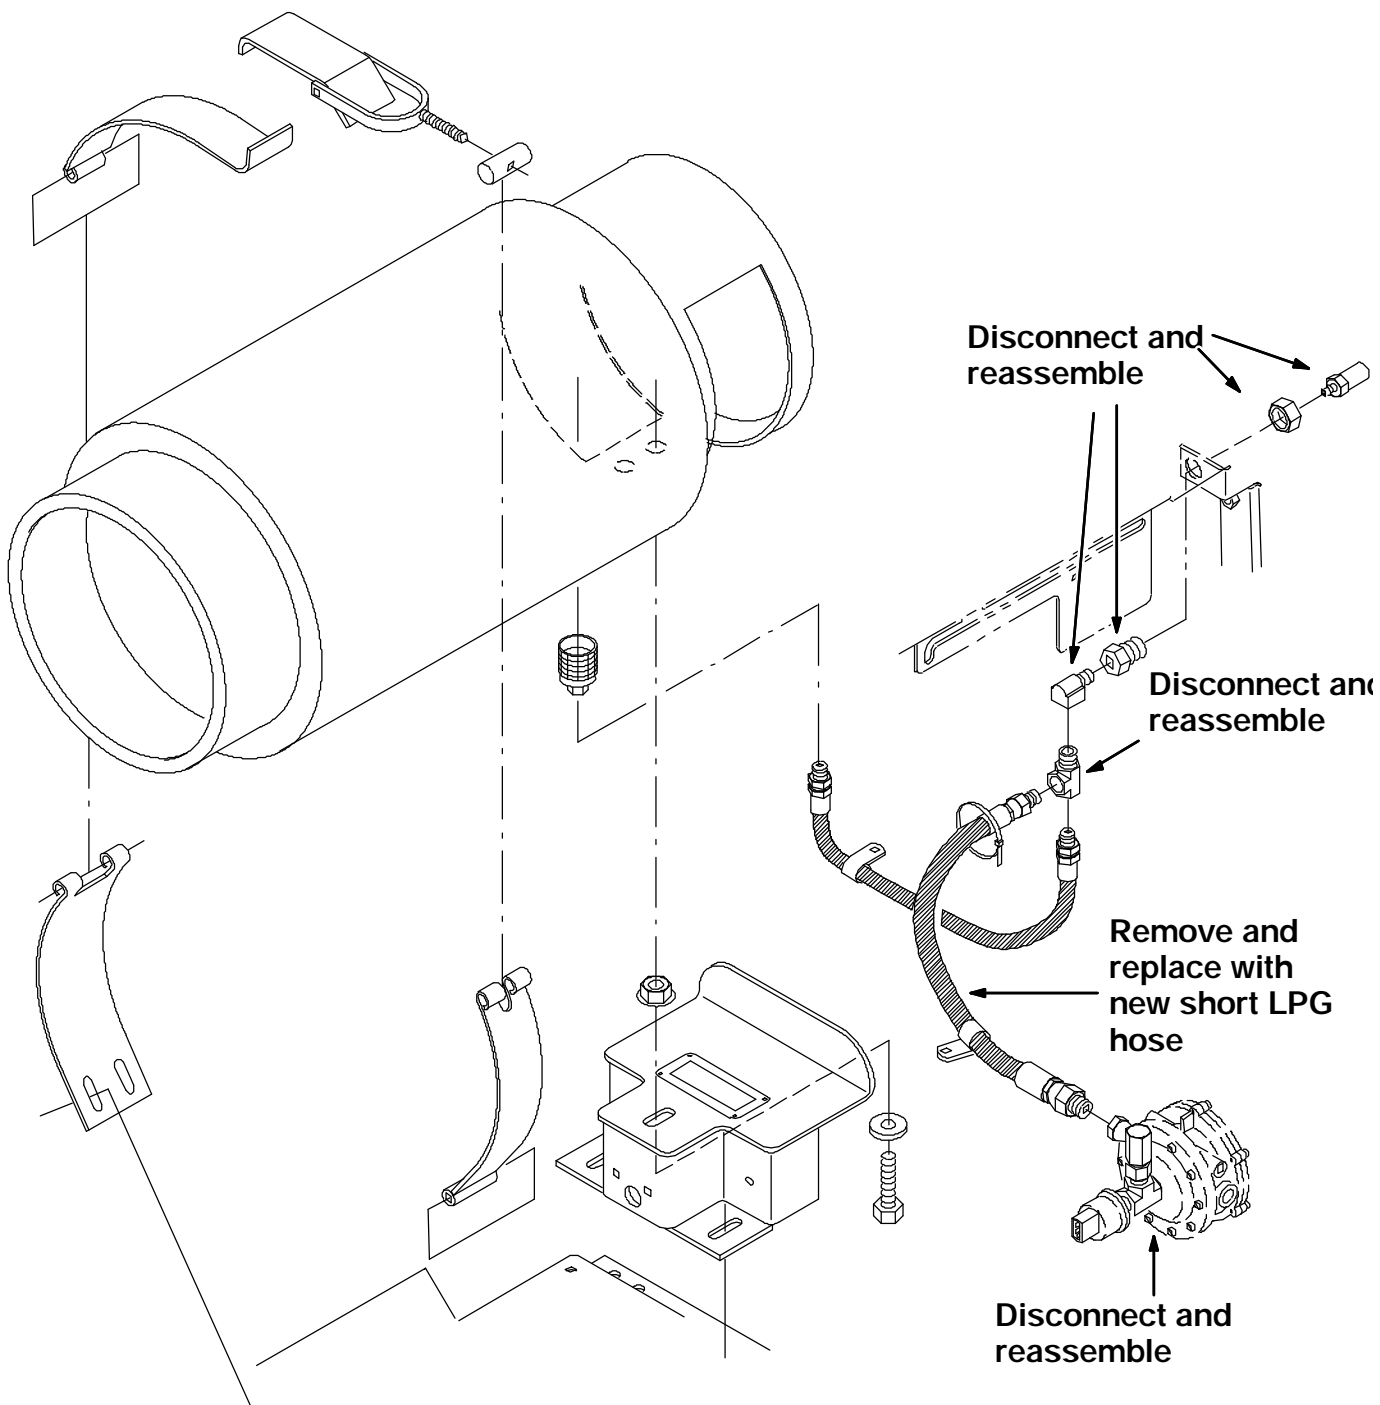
PRESS RELIEF VALVE REASSEMBLY
